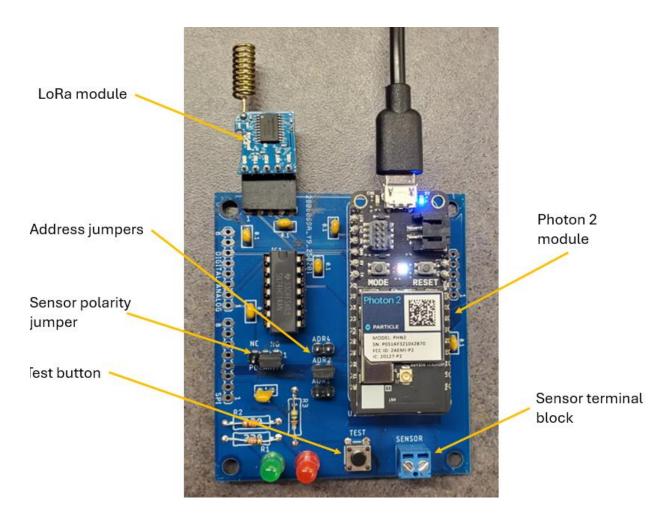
Assembled Hub/Test Sensor Printed Circuit Board.
